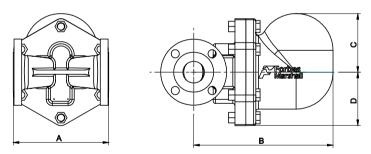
Dimensional Drawing of SOFT31 Flanged ends
